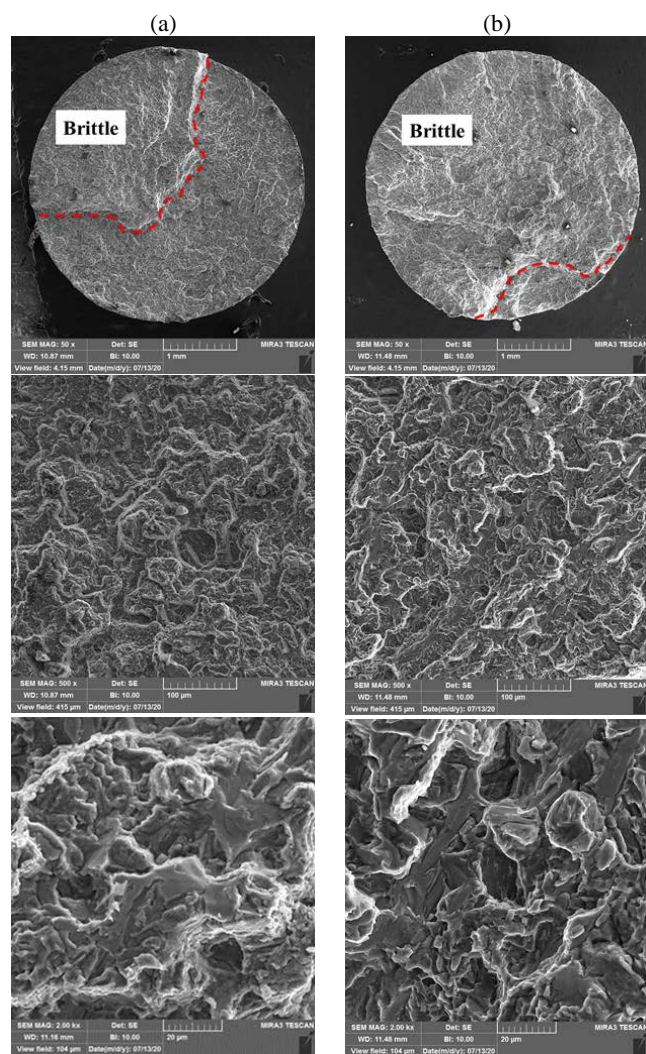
The image of the field-emission scanning electron microscopy from fracture surfaces for aluminum-silicon alloys under 150 MPa stress level for (a) the pure fatigue test and for (b) the corrosion-fatigue test
